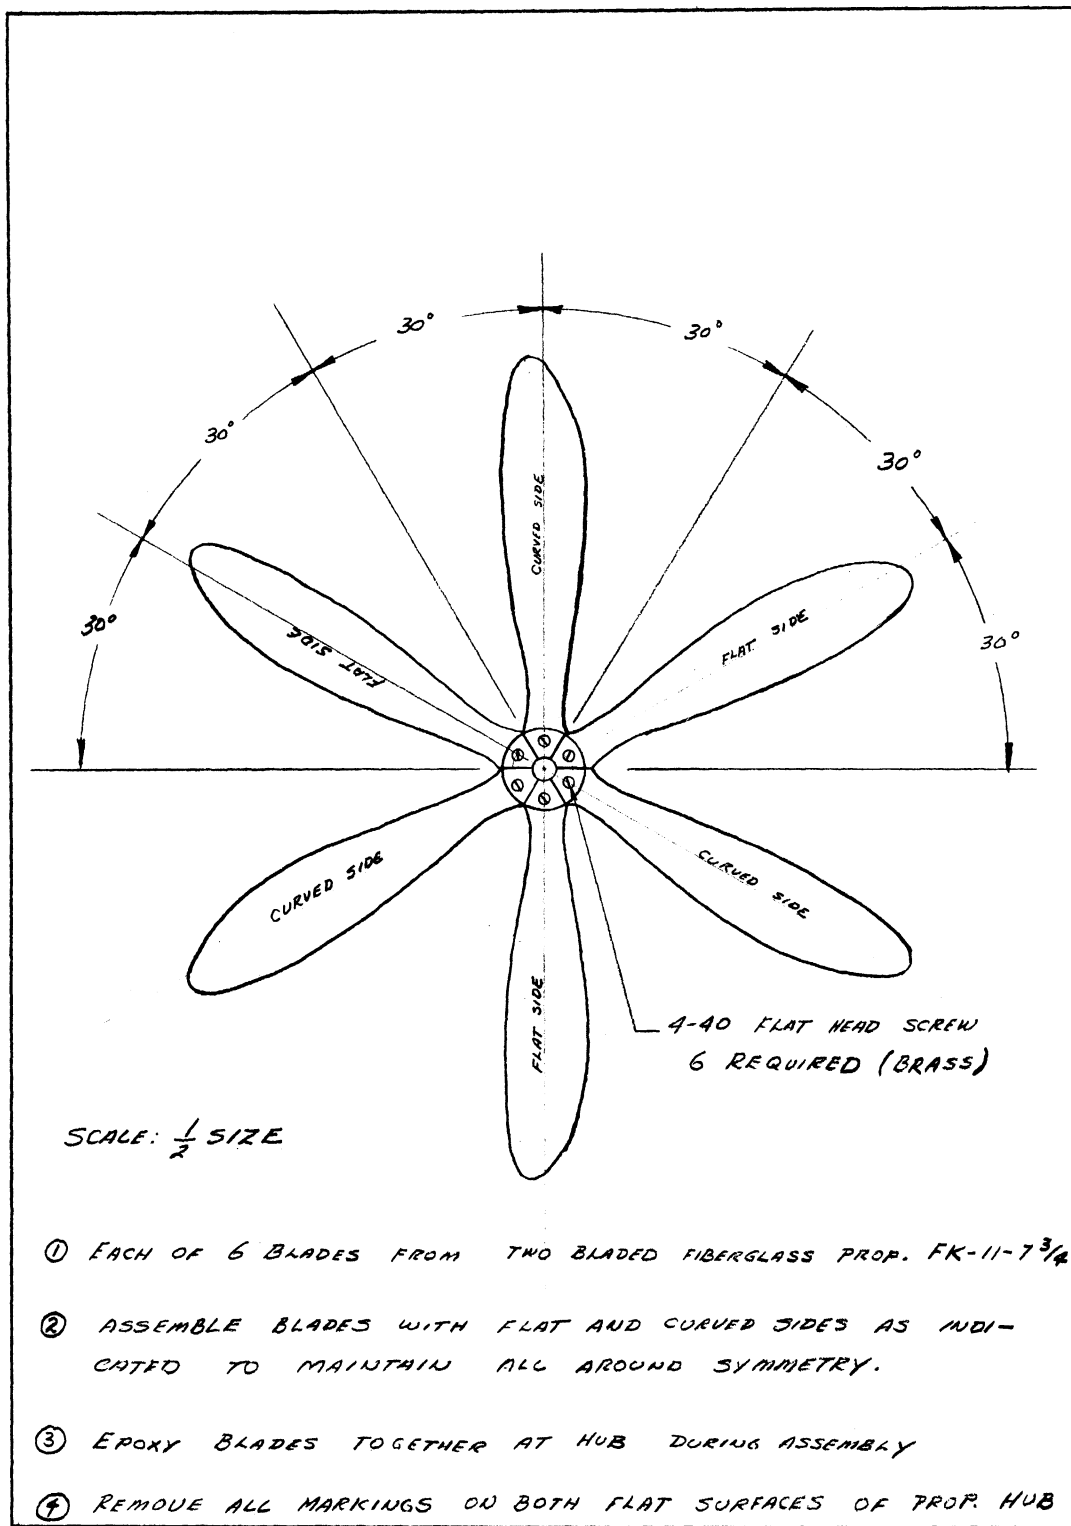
Assembly drawing of six-bladed propeller--made from three two-bladed propellers.
